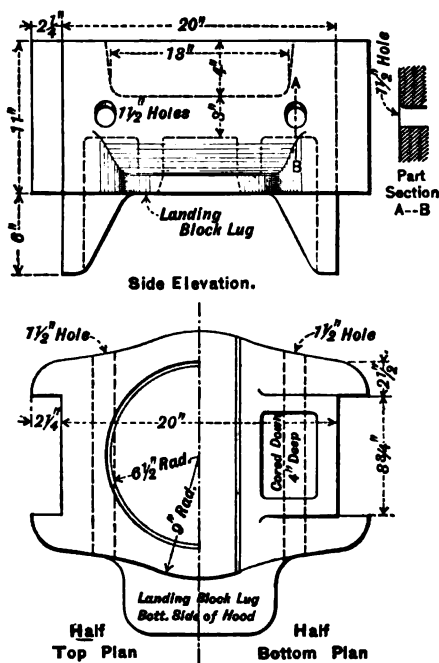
Cast-Iron Follower for Driving Steel Sheet Piles.
